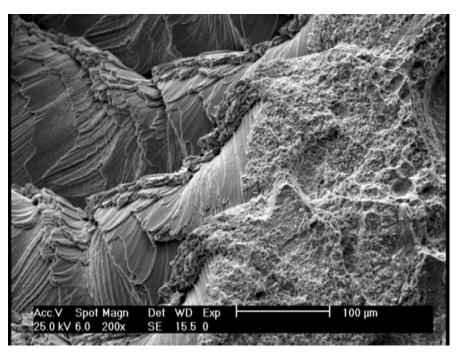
Fracture appearance of the fatigue specimens welded at 150 mm/min, this is regarding the stir zone where there is a proper and desirable stirring/mixing of dissimilar materials
